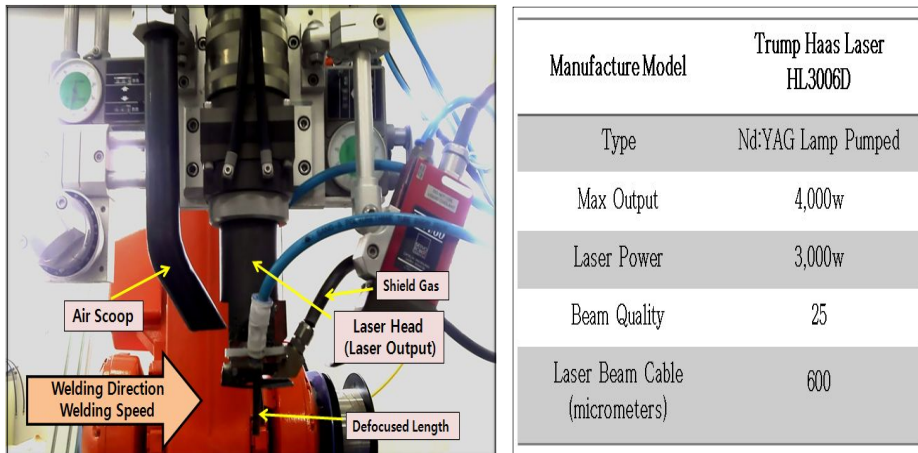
Nd:YAG Laser Stitch Welding equipment in details
